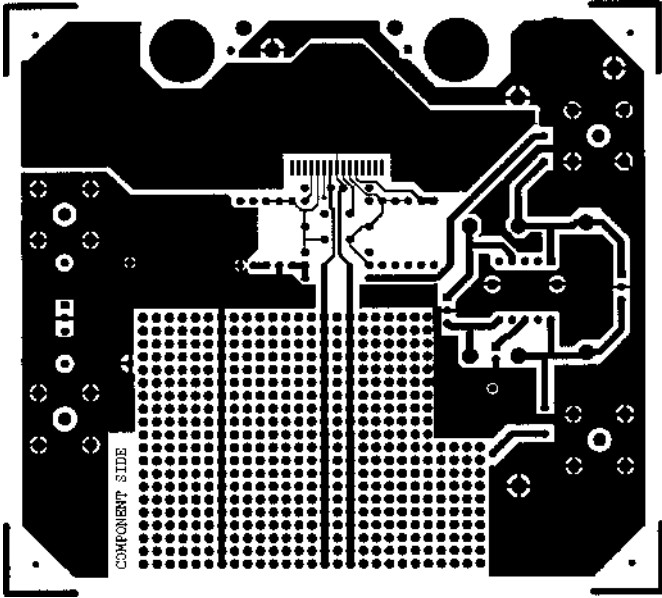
AD815 AVR Evaluation Board Layout (Component Side)
